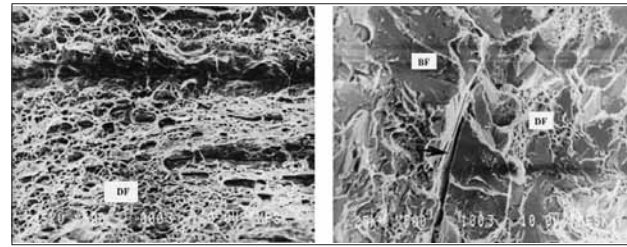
Fractured surface (segment 7 Serie III), a. base metal, b. weld metal
